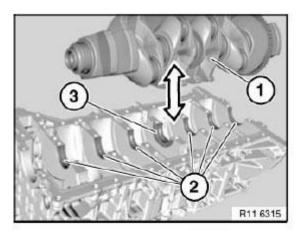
Identifying Bearing Shell And Crankshaft Courtesy of BMW OF NORTH AMERICA, INC.
